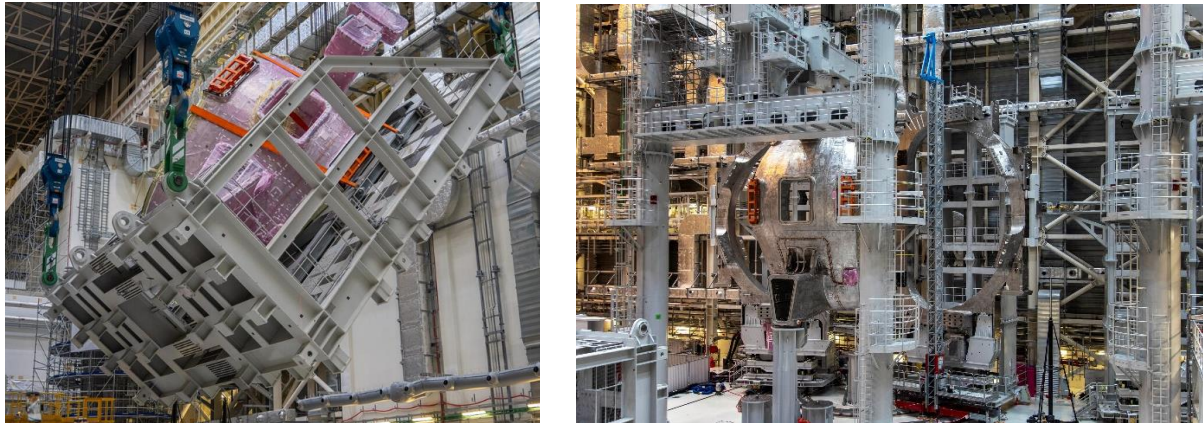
, 4: Upending Tool to bring the Vacuum Sector into an upright position & Sector Sub-Assembly Tool with Vacuum Vessel in middle position and Toroidal Field coils on rotating arms
